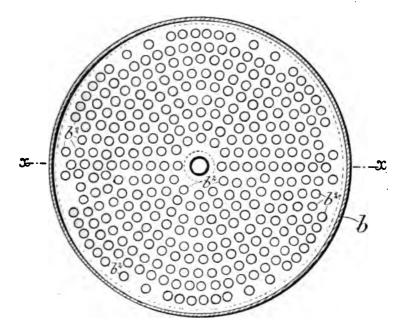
Clarkson steam omnibus. Horizontal section of multitubular boiler.
